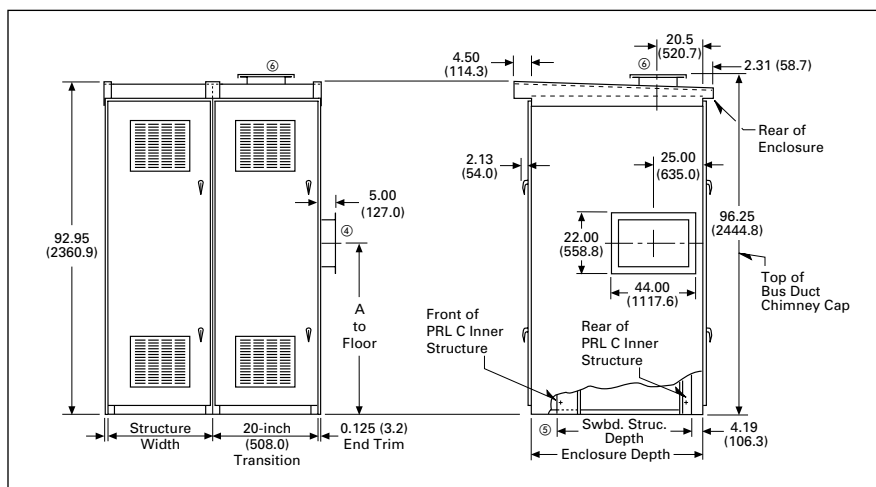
Rear Access—Non-Walk-in with Sloped Roof—Dimensions in Inches (mm)
